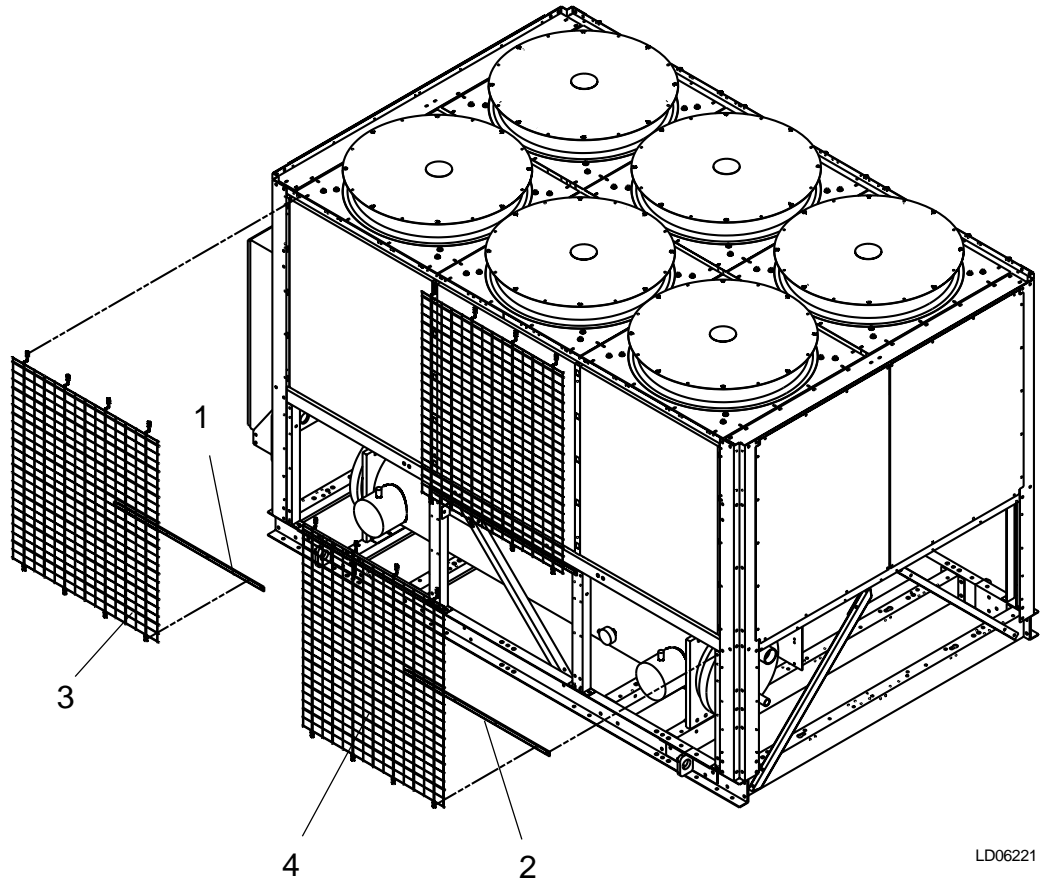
TOP SECTION - WIRE ENCLOSURE - KIT NO. 375-29569-100 IS SHOWN.
